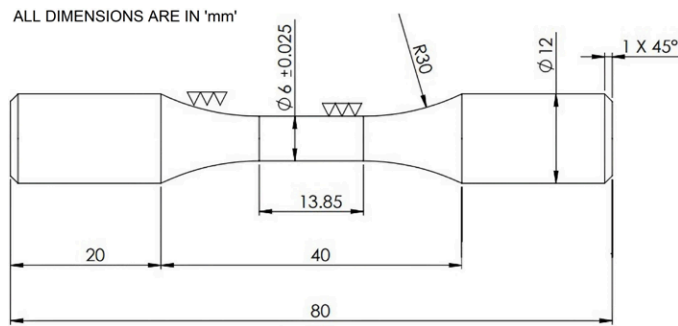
Fatigue specimen dimension of Al2016-T6 as per ASTM standard E606/E606M-12
